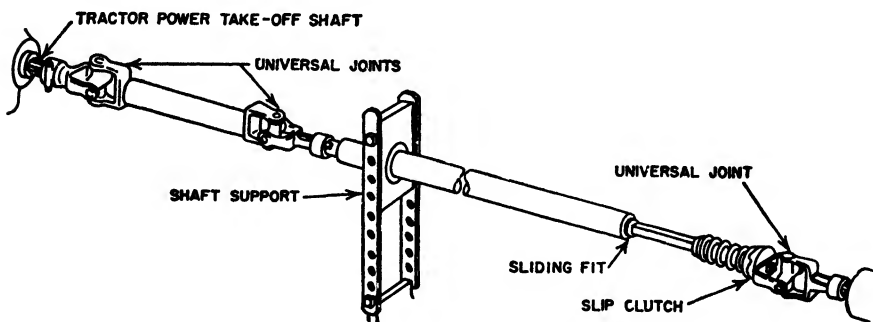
Complete power take-off shaft with three universal joints, safety snap clutch, and shaft support. The safety shield has been removed to show all parts of the assembly.
